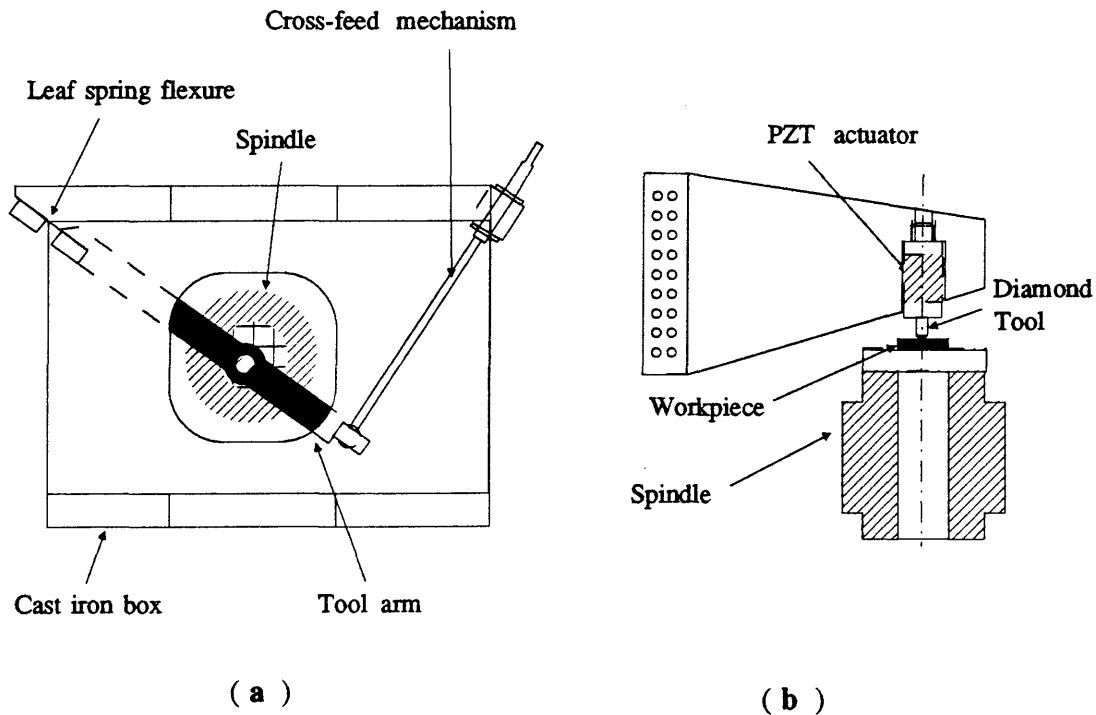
(a) Top view of the central frame of the machine (b) side view of tool arm, tool and PZT actuator.
